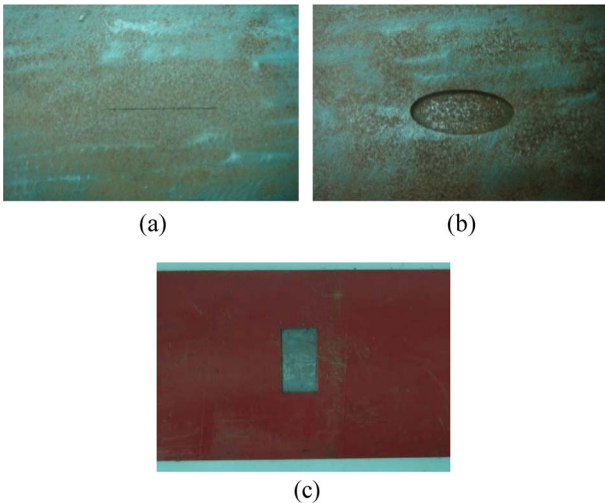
Photos of the fabricated gas pipe specimens with: (a) axial crack (depth: 30%); (b) axial groove (depth: 30%); (c) a coating disbondment.
